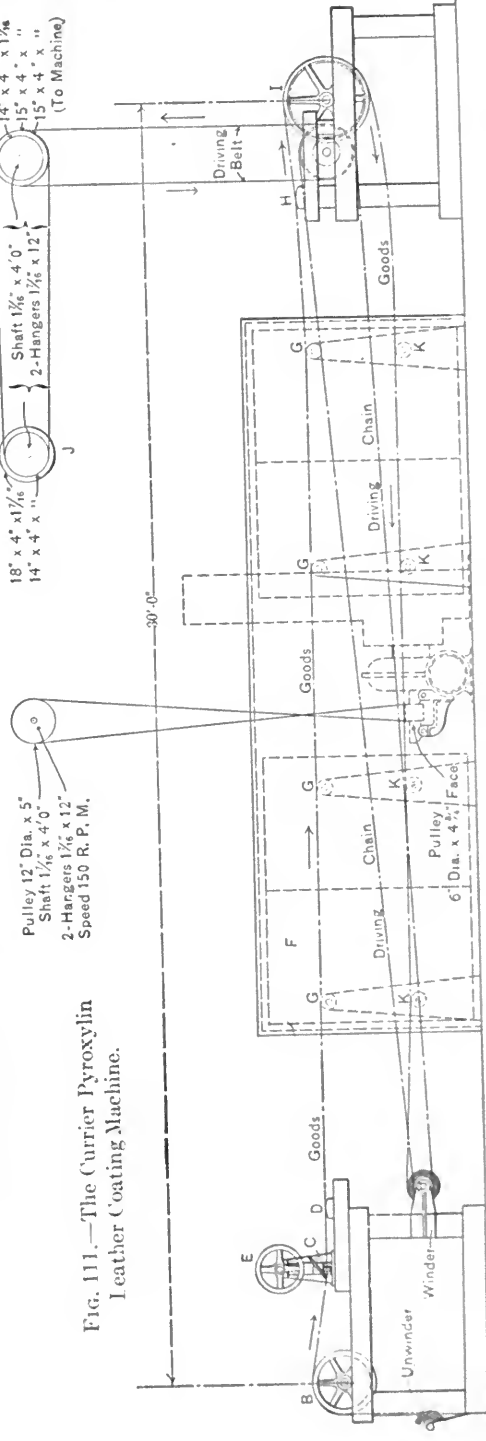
The Carrier Pyroxylin Leather Coating Machine.
